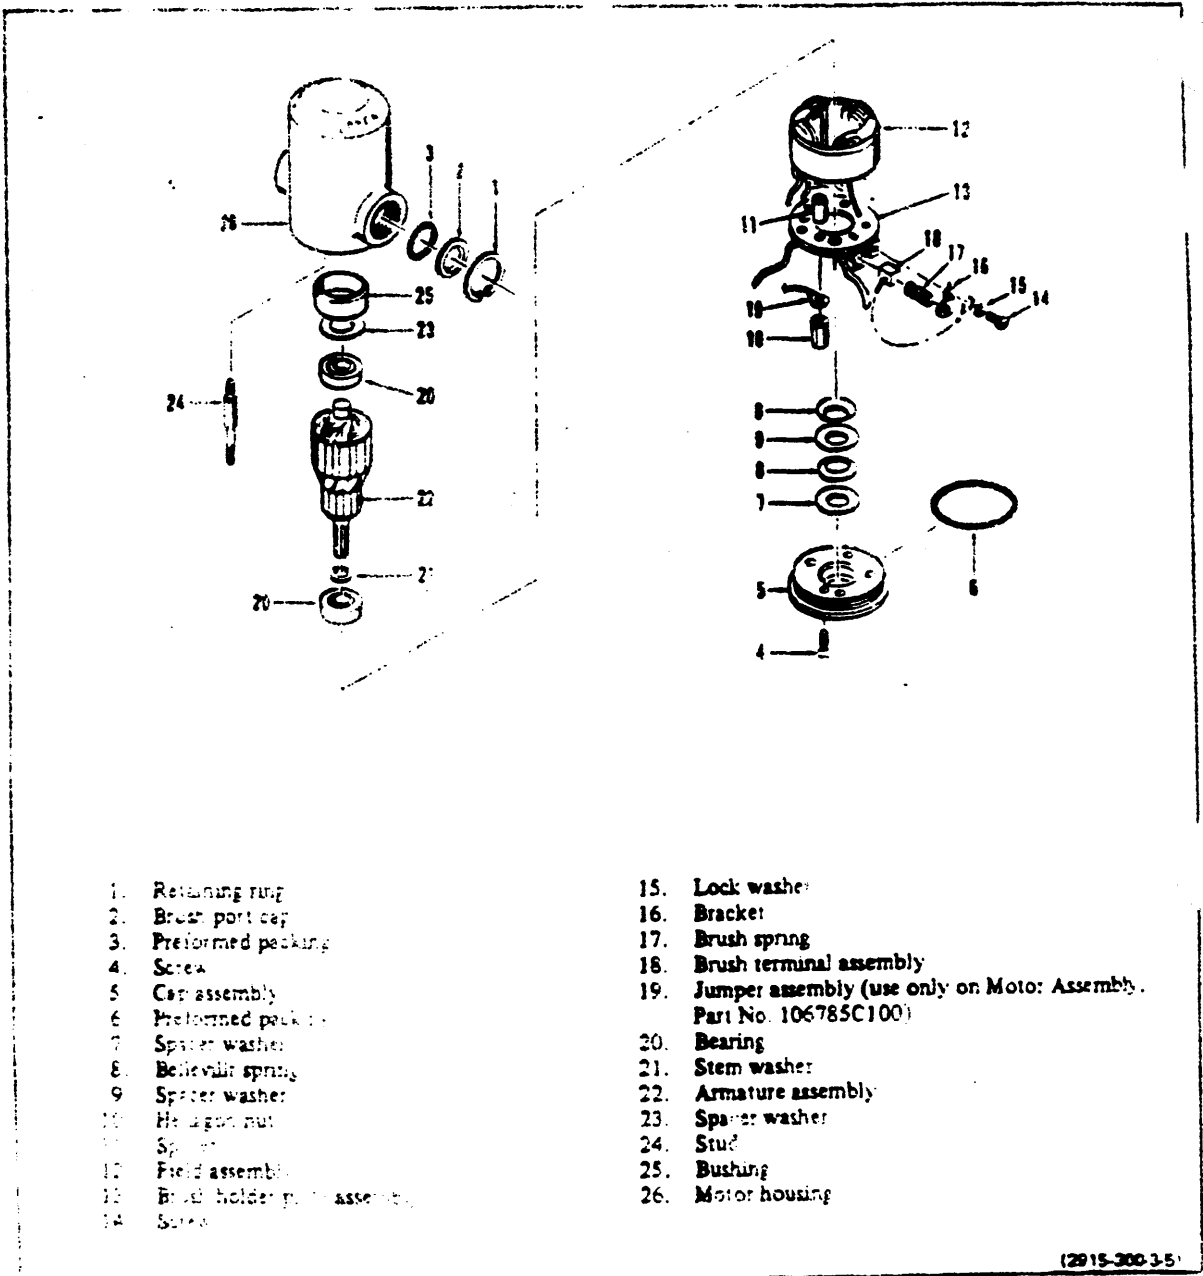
Motor Assembly, Part No. 106785C100 and 102650U100 -- Exploded View
